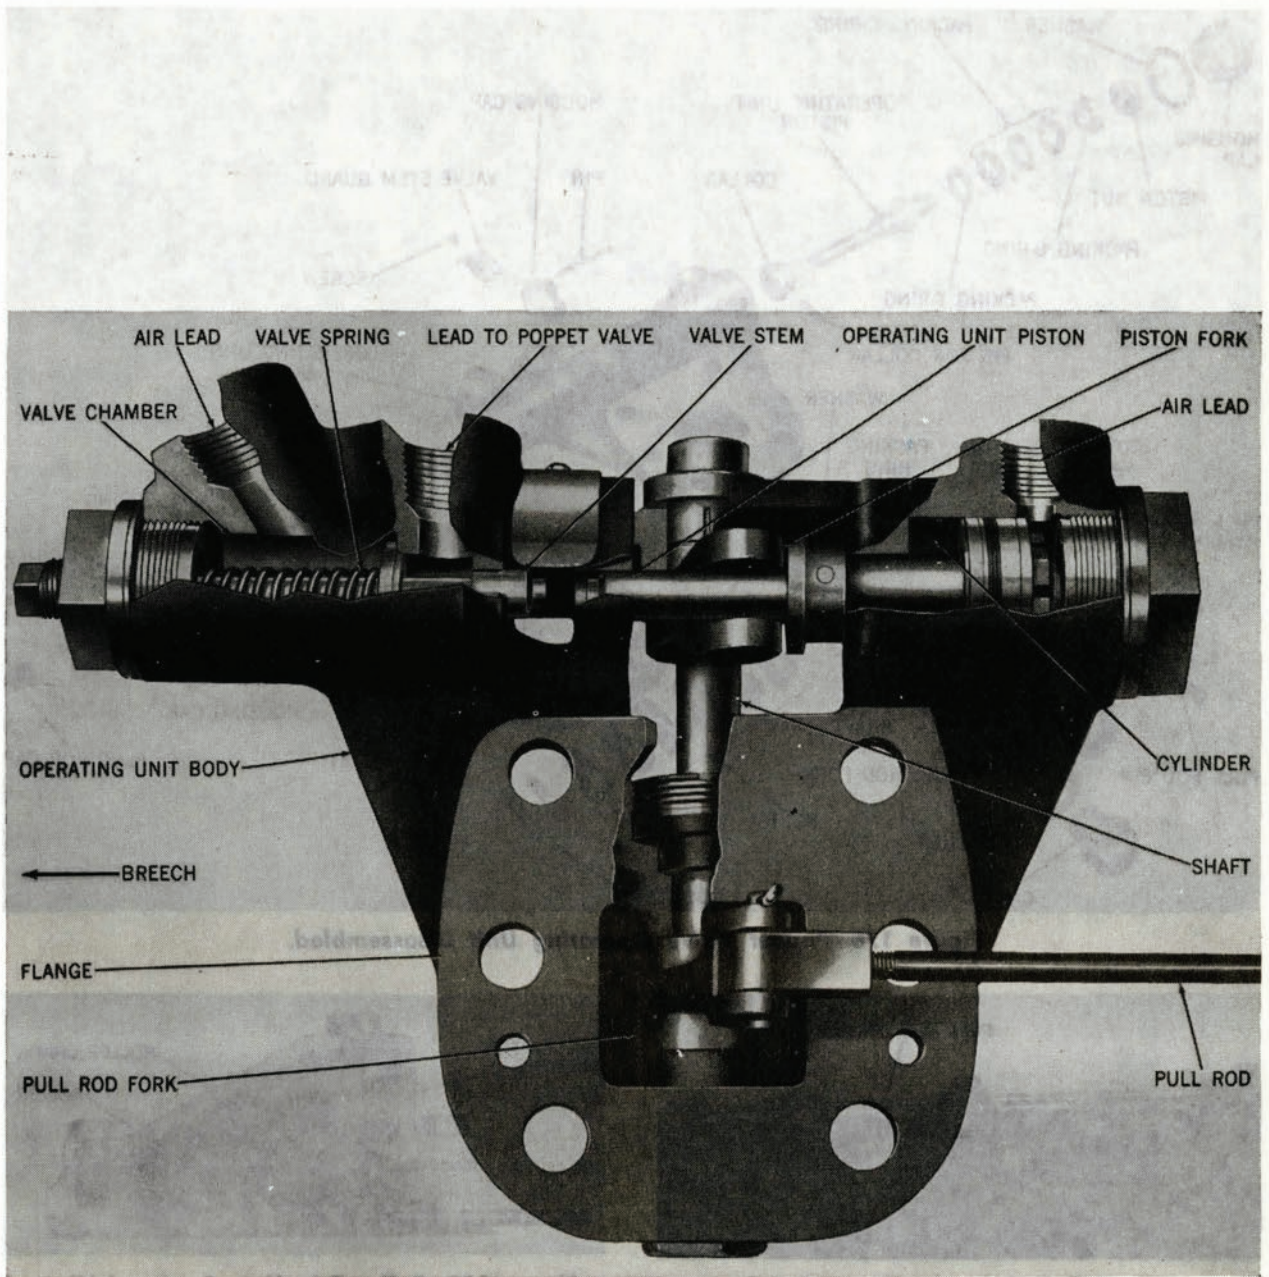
Poppet Valve Operating Unit—Poppet Valve Closed—Sectional View.
